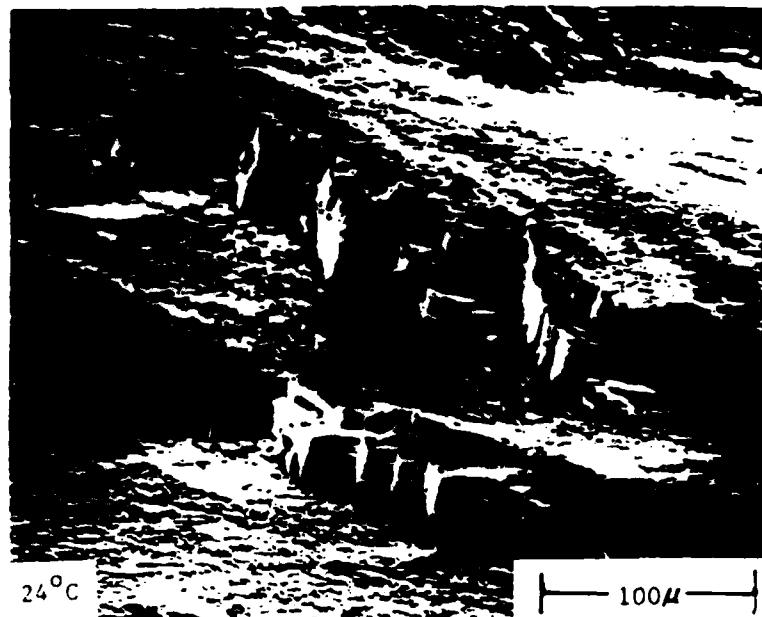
Fatigue fracture surface of MA 6000 in L-T orientation at 24°C.
